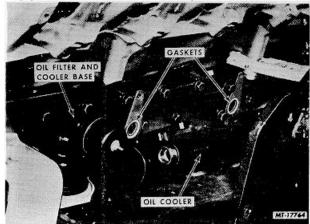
Removing Oil Cooler 8. Remove both oil filters from oil filter base. Remove filter base capscrews and remove filter base and gasket from engine (Figure 22).
